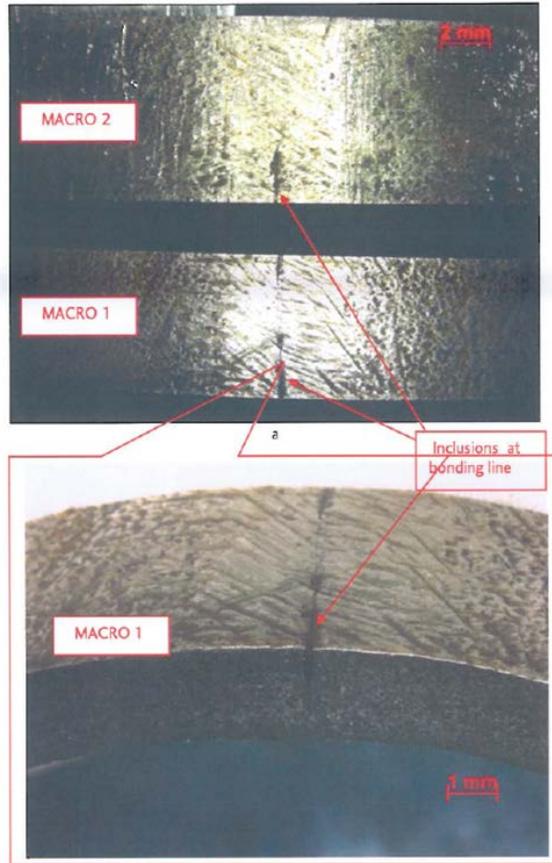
Inclusion at Pipe Weld Seam on Vintage NPS 2 Gas Main
